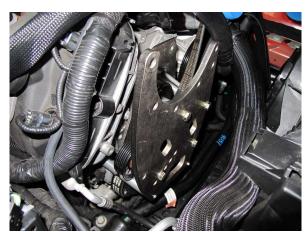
i: Slide Mounting Bracket Assembly Onto Studs
